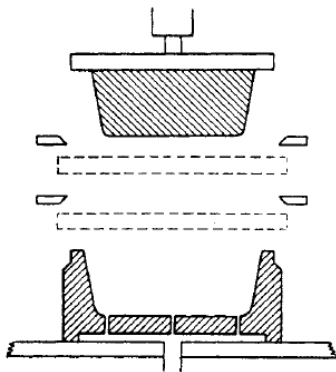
Pressure forming into female cavity. Heated sheet is clamped over cavity, and compressed air pressure forces the sheet into the mold. (Courtesy Dow)
